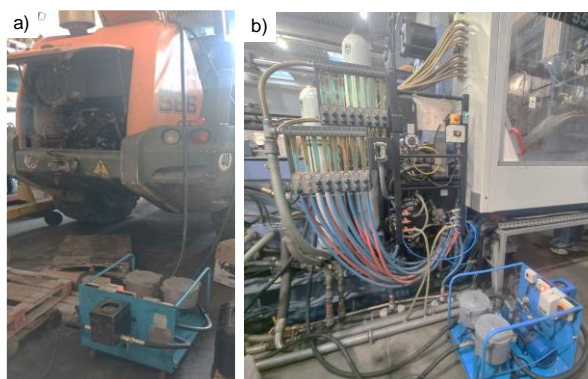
View of the machine's use during microfiltration of hydraulic oil in: a) Liebherr 566 wheel loader, b) Billion H3500/550 injection molding machine [fot. S. Kołodziejcki]
